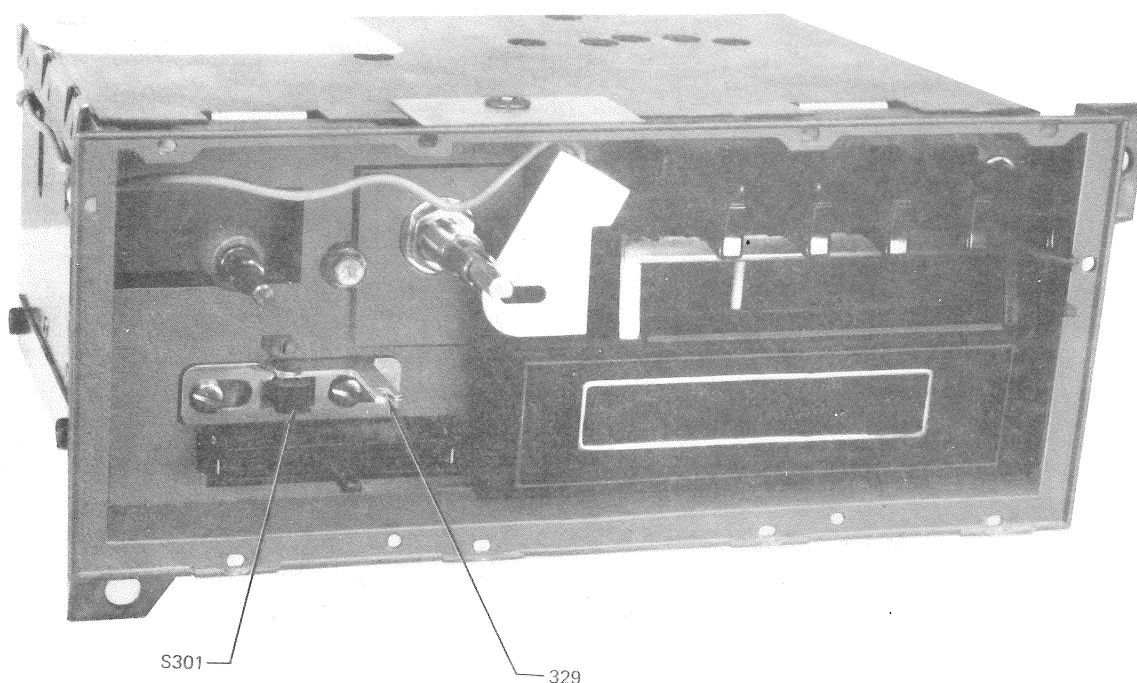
PARTS LOCATION, LENS ASSEMBLY REMOVED (3501458)
